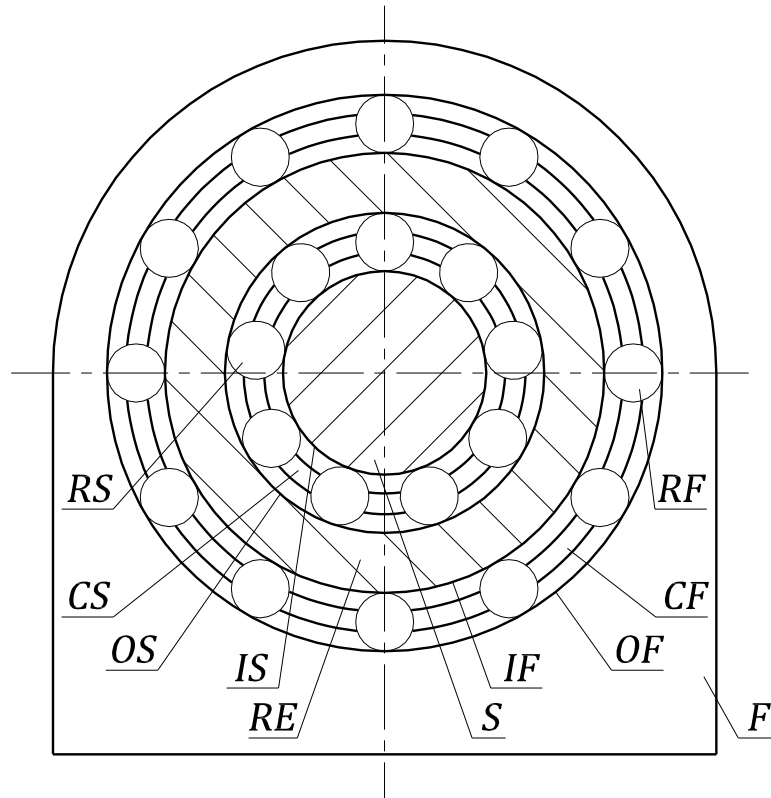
Simplified diagram of the sprocket shaft bearing assembly
